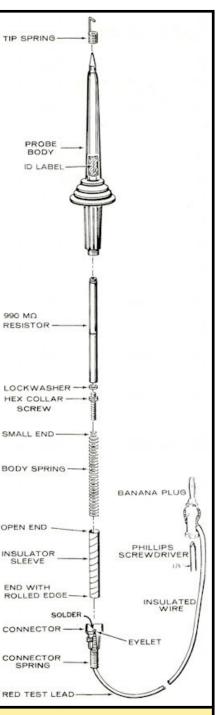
Assembly drawing of the IMA-100-10 and its banana plug output connection.
